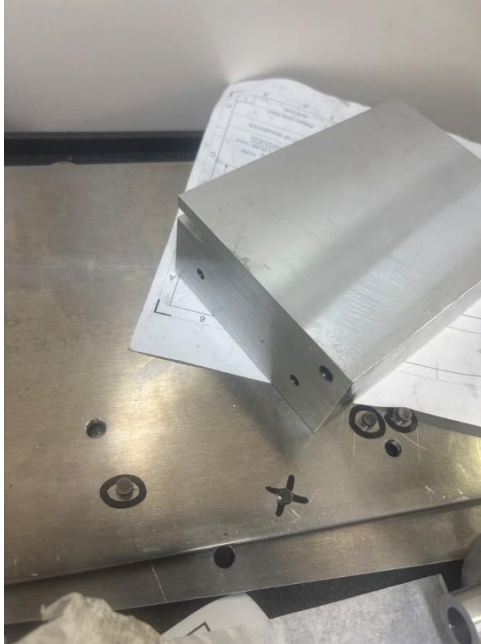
Completed cone riser block, with all features completed as well as sides faced off.
